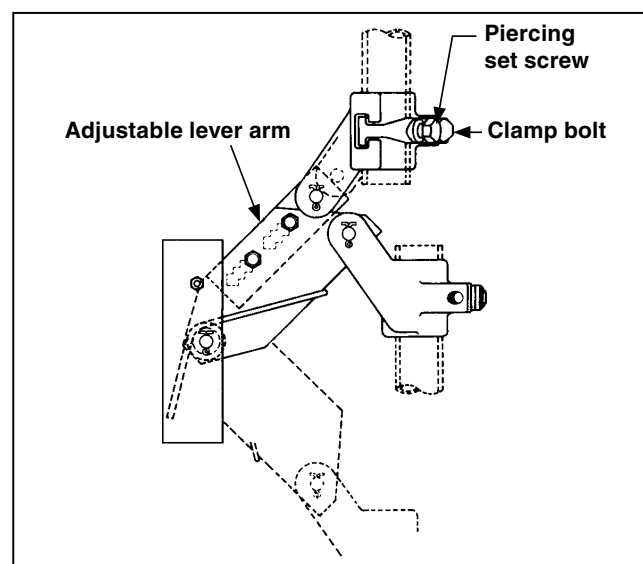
Shortening the adjustable drive lever on the uppermost rod guide assembly.
